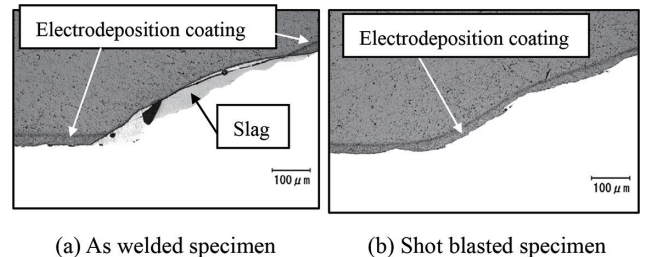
Cross section of toe of arc welds after electrodeposition (440 MPa steel)
